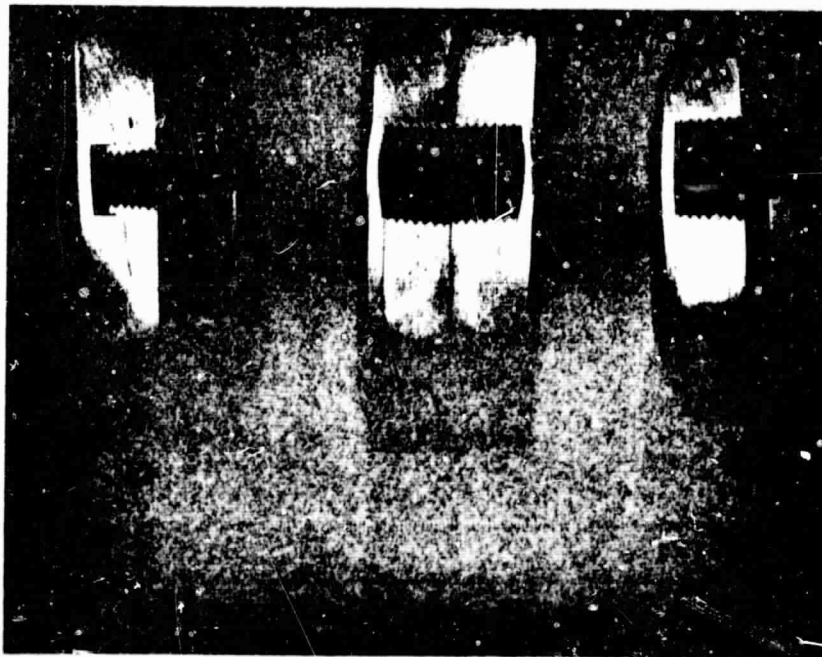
Photograph of explosively welded plates after blister testing sectioning and polishing.
